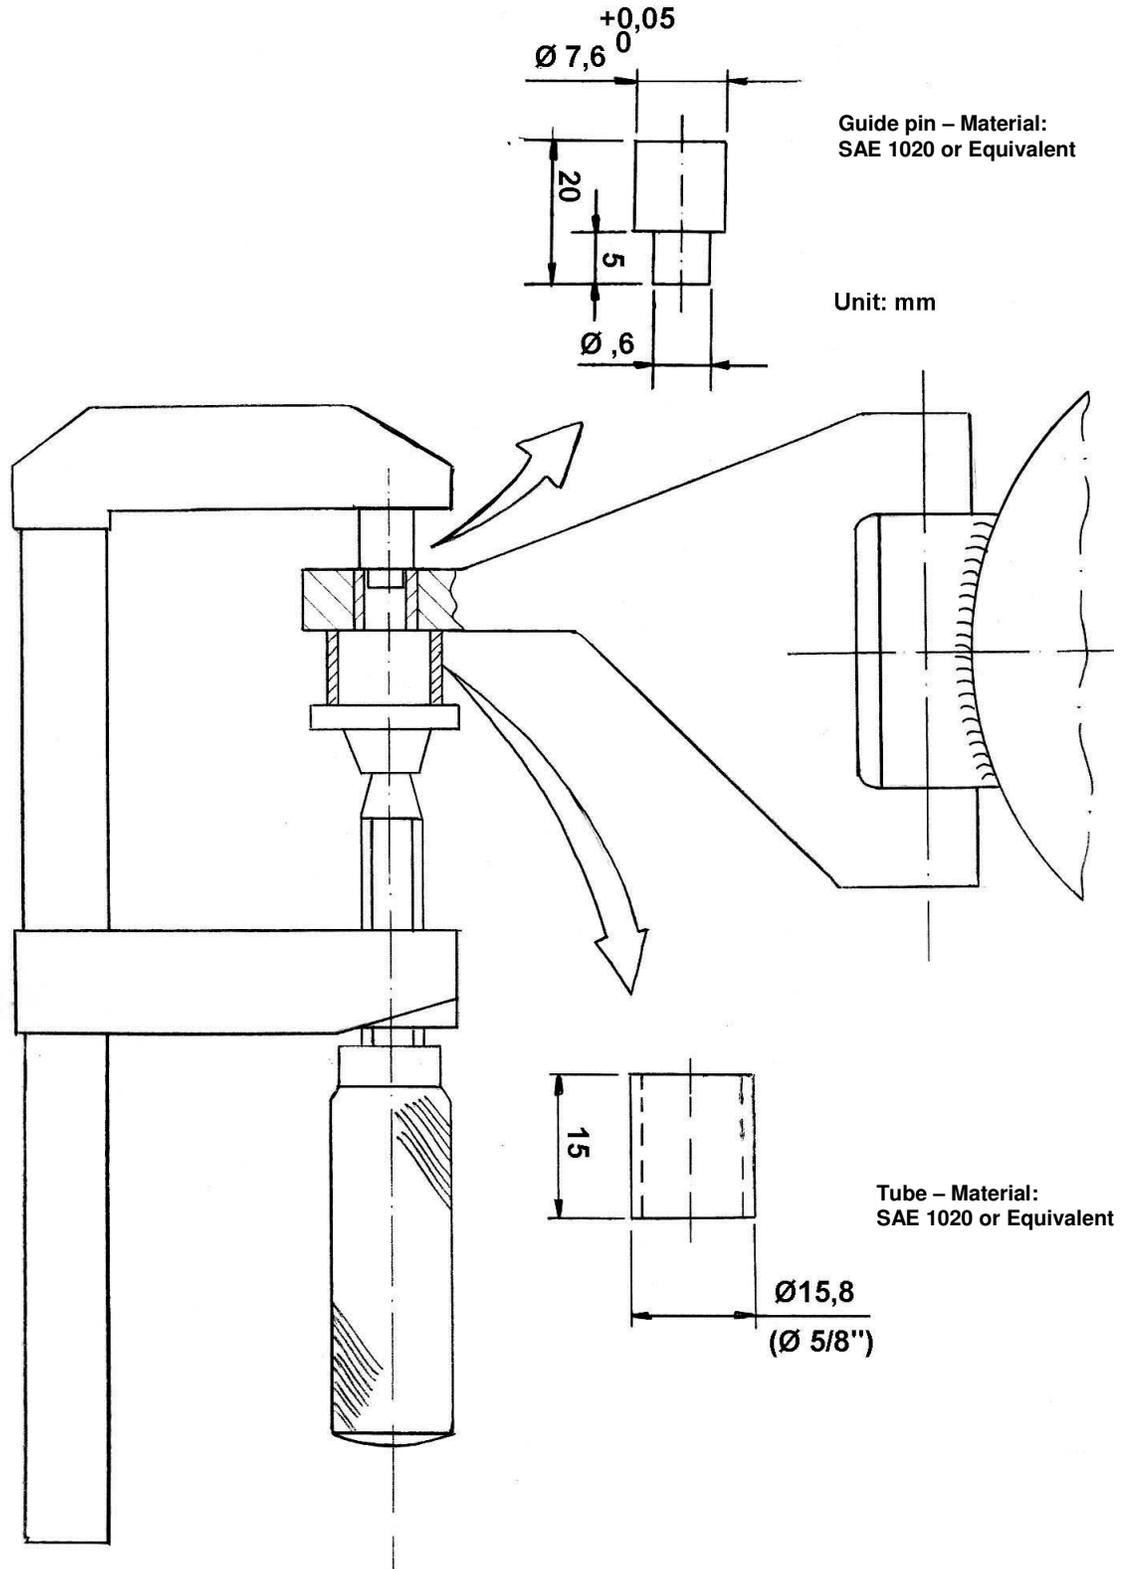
REMOVAL OF BUSHING P/N MB 06-10DU
